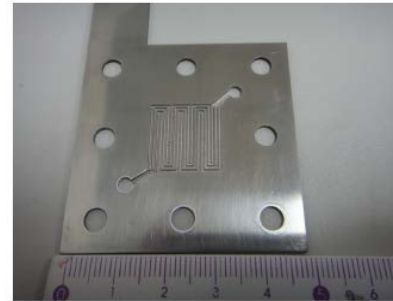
Metallic bipolar plates fabricated using micro EDM milling [16]
